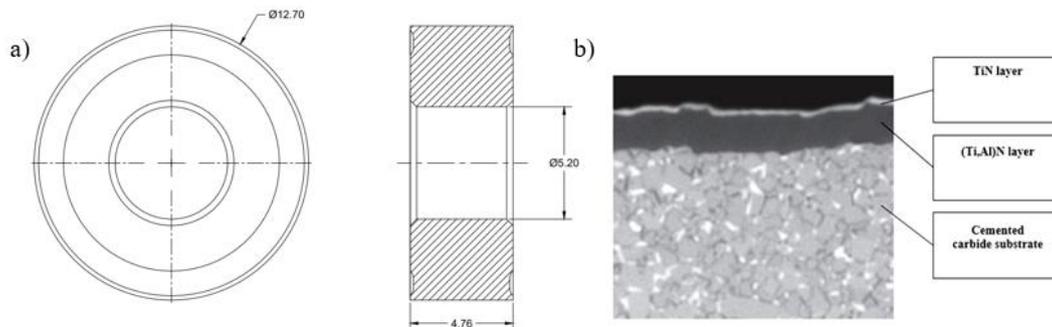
Coated carbide inserts specifications. a) Dimensions; b) Coating layers (Adapted from SECO, 2020).
